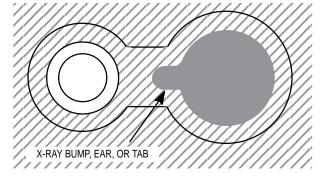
PBGA Pad with Bump to Facilitate X-ray Inspection
